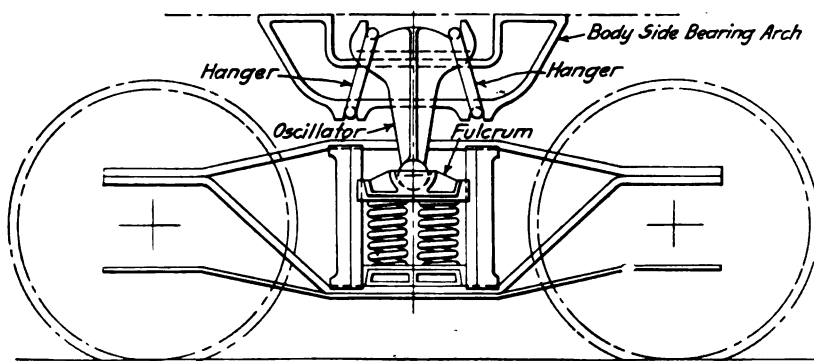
Standard Truck With Weight of Body Transferred Through the Side Bearings.
